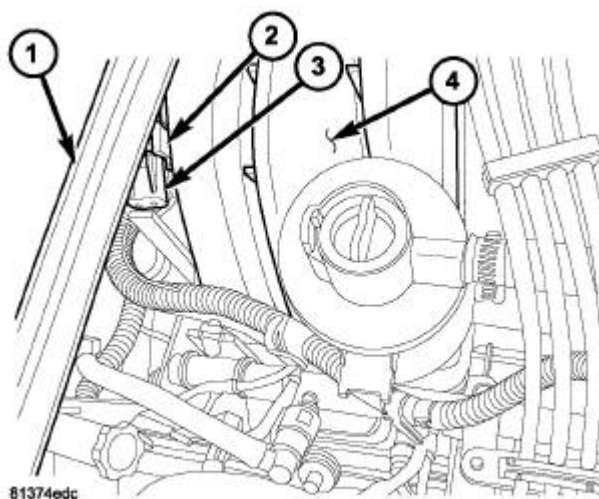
Locating Manifold Air Pressure (MAP) Sensor - 5.7L
